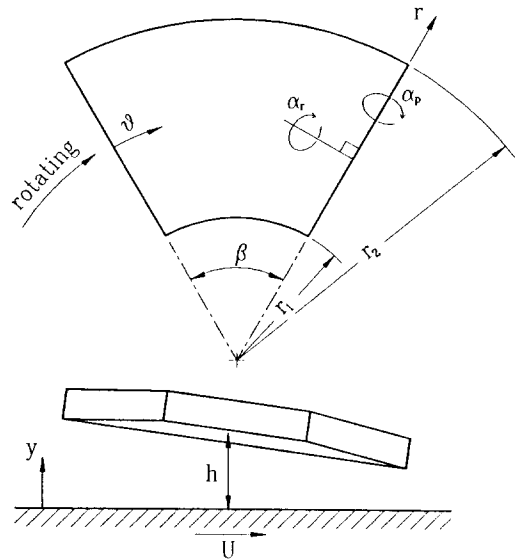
Geometry and coordinate system of a sector-shaped pad.
